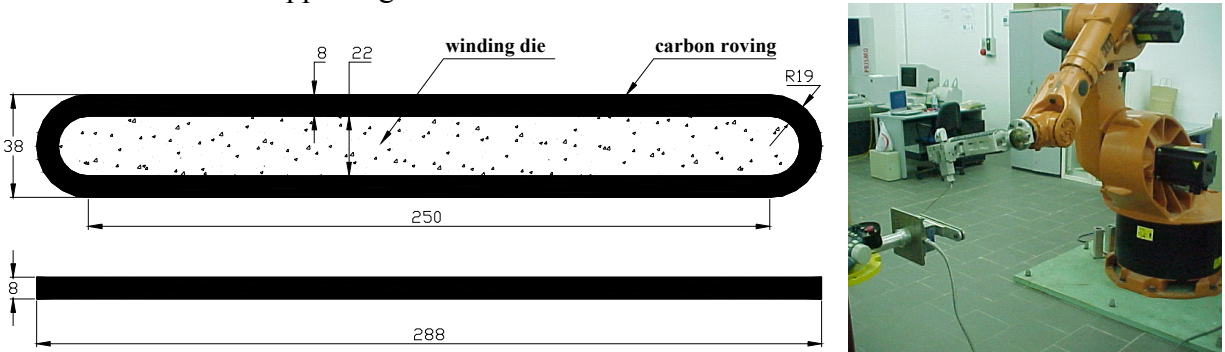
Dimensions (in mm) of the irregular ring – benchmark and robotized filament winding cell
